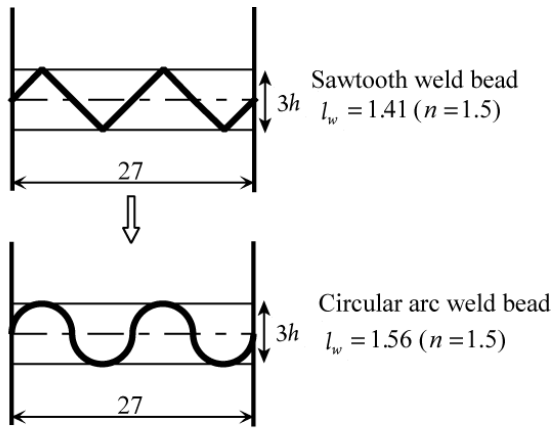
Circular arc weld bead pattern of lap joint
